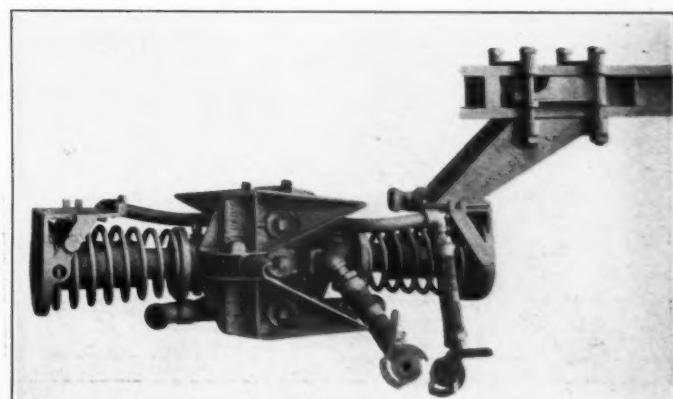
Method of Attaching to Three-Stem Passenger Coupler Shank
